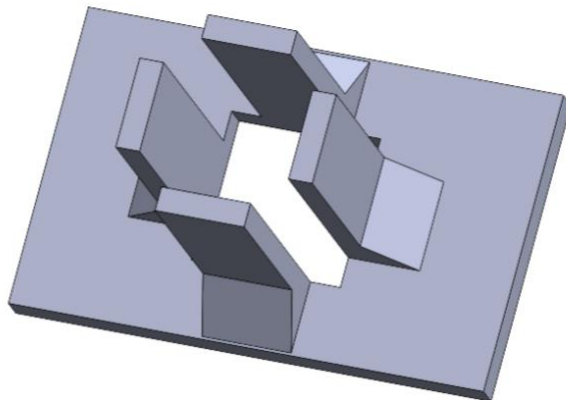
Assembly of Tube Mold Jig in SolidWorks
